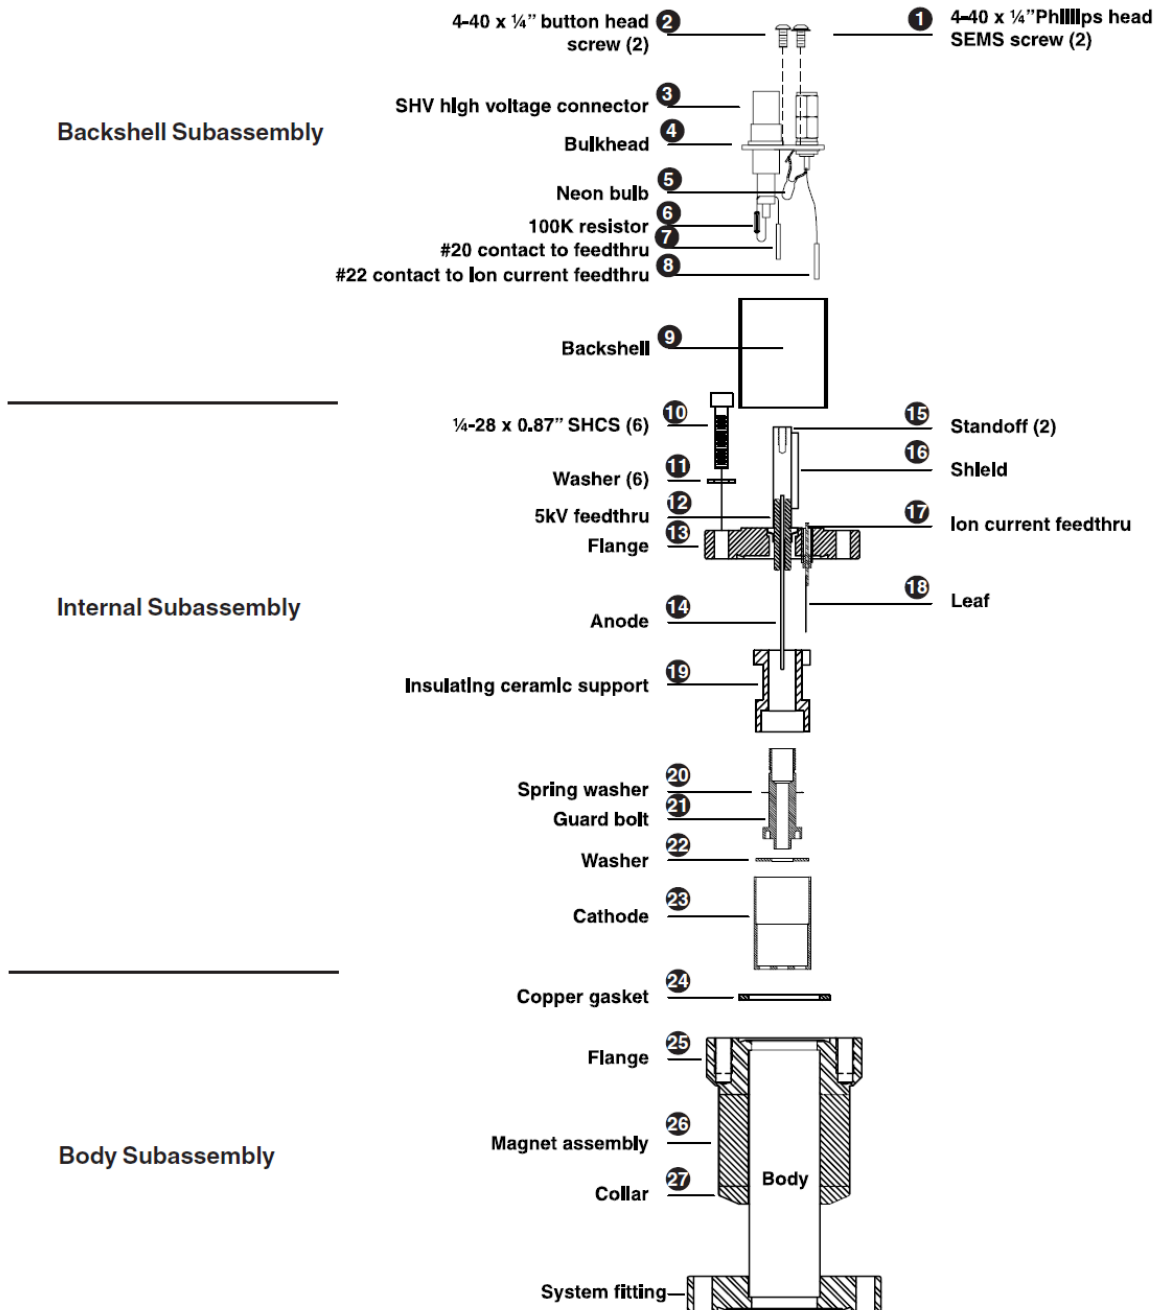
Exploded View of the 431/422 Cold Cathode Gauge Assembly
